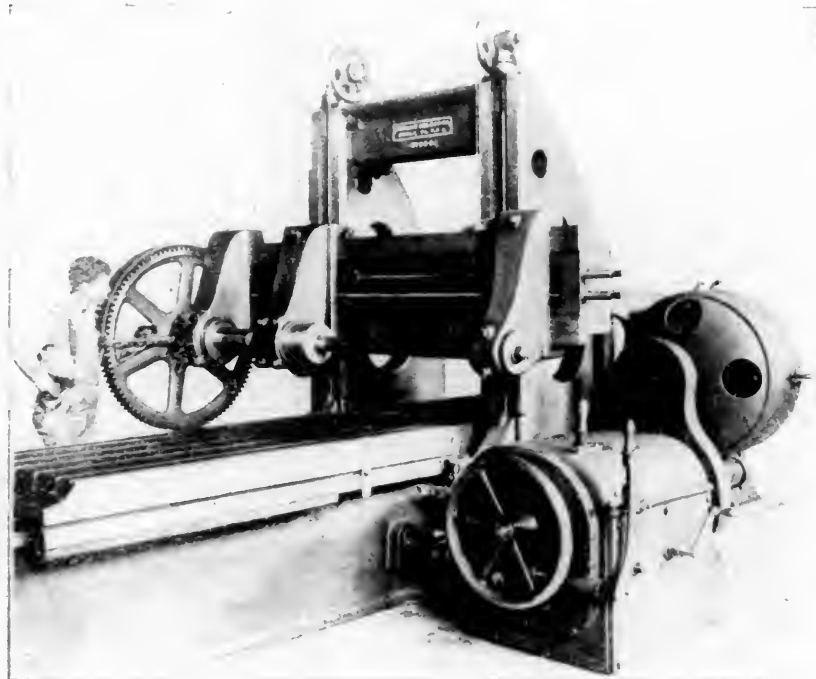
VARIABLE-SPEED MOTOR DRIVE, USING GEAR MECHANISM, FOR BEAUMONT, MITTS & CO. STEEL MILLING MACHINE.—CROCKER-WHITE MOTOR.
